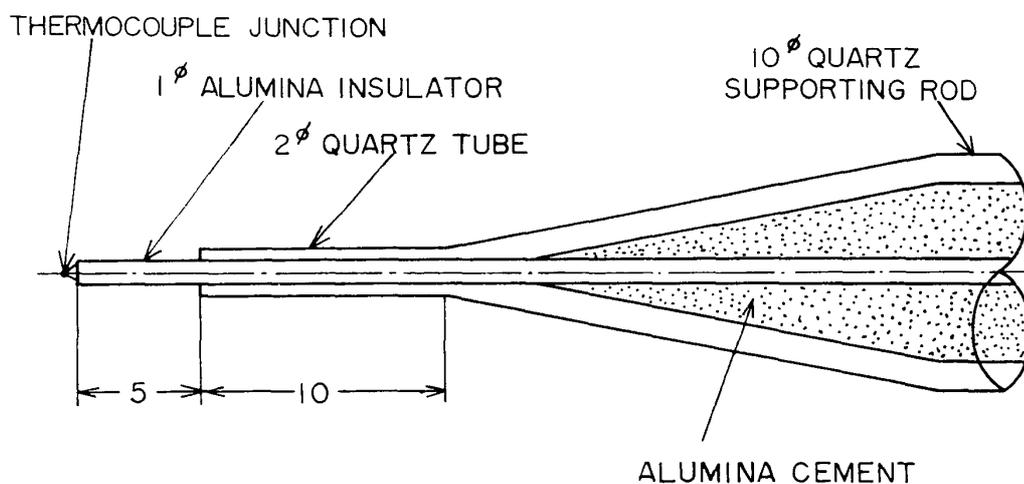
Exposed-junction thermocouple. Dimensions are in millimeters.
